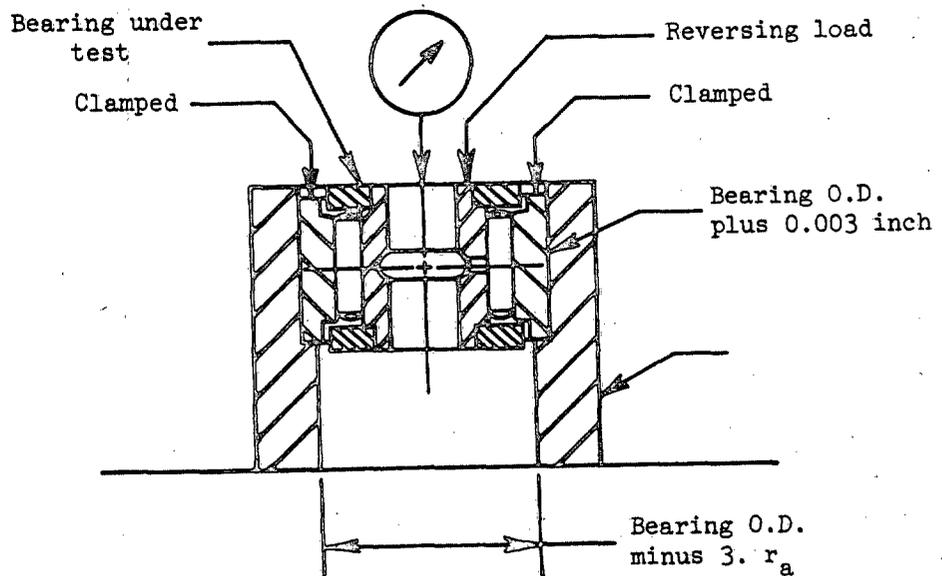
Axial play test for types I, III, IV, V, VI and X bearings.
